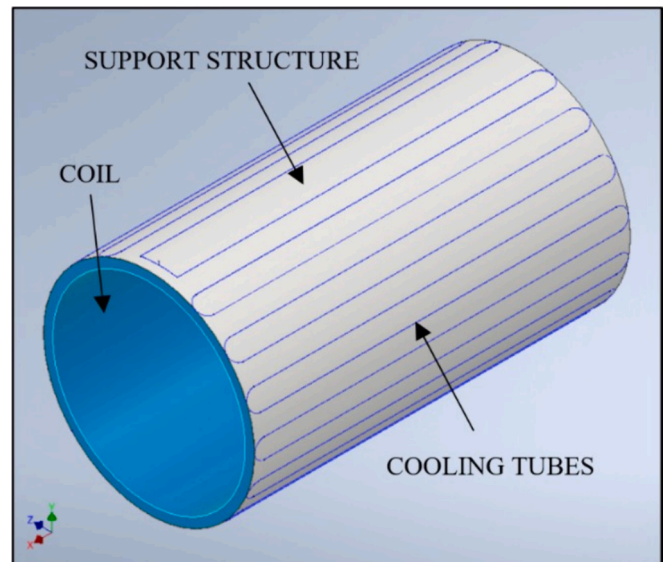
3D model of the serpentine cooling circuit (illustrative drawing).
